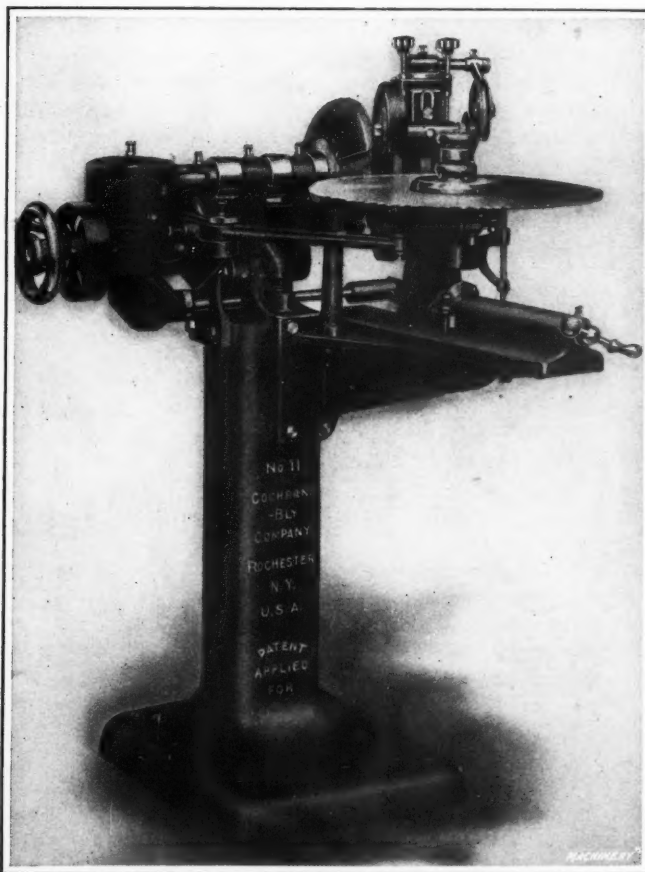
Cochrane-Bly Grinder for sharpening B. & S. Relieved Type of Circular Saw Teeth
